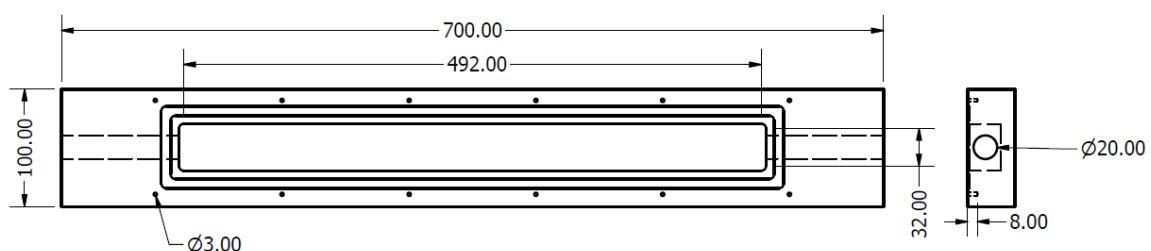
General dimensions of machined acrylic rectangular block for experimental flow chamber
